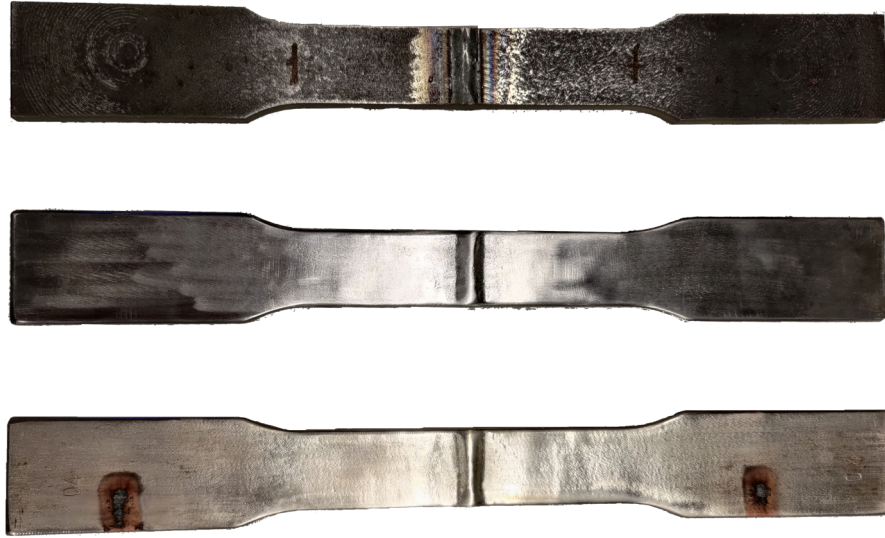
Dogbone specimen as-welded, machined and coated with Cu/Ni NMM
